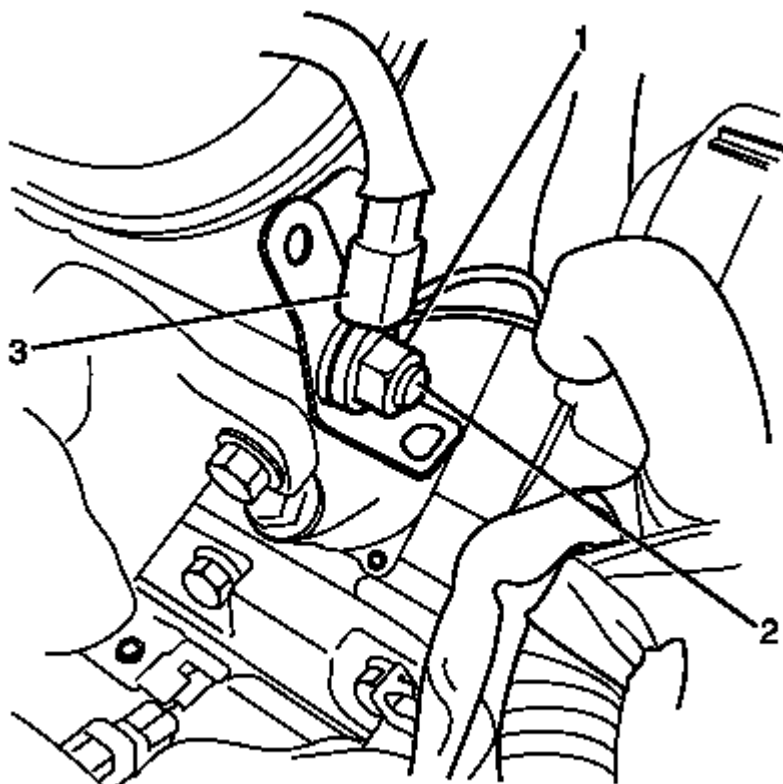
Identifying Vehicle Body Ground Cable To Cylinder Head Retaining Nut
